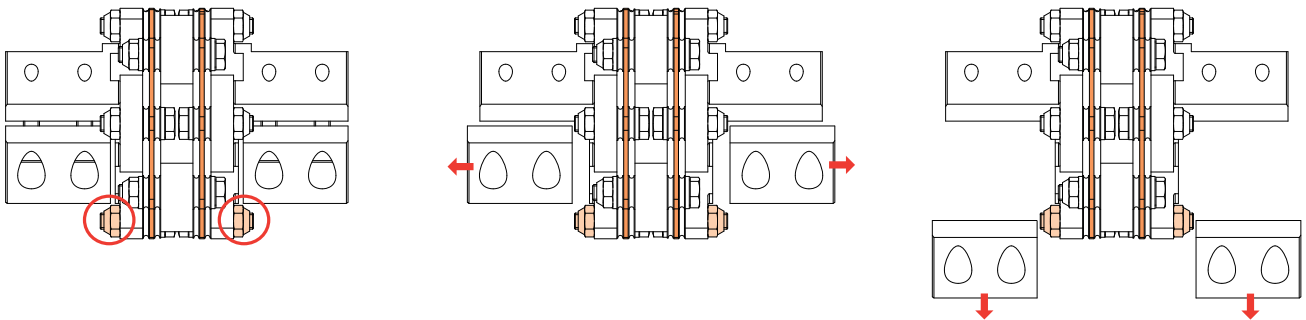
Axial displacement of the half-shells during radial assembly/disassembly
